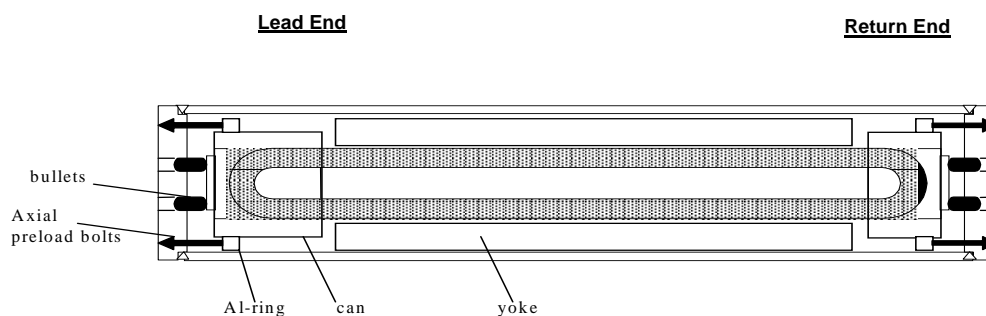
Axial Support of the Cold Mass Assembly
